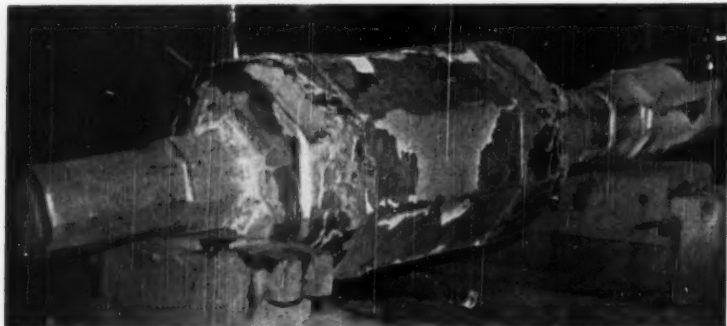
END SHAFTS OF ROTOR COMPLETED WITH BODY STILL A 44-IN. OCTAGON
